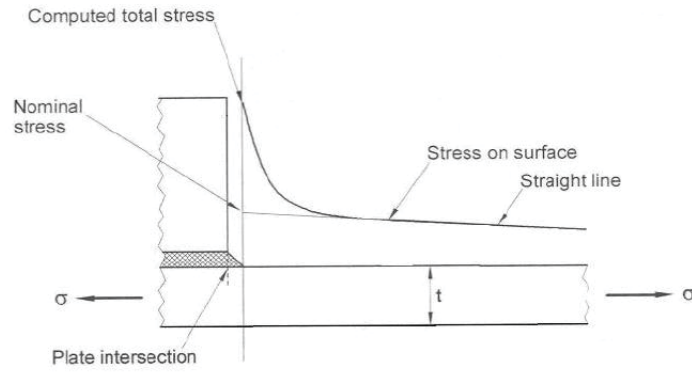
Extrapolated nominal stress in welded joint.
